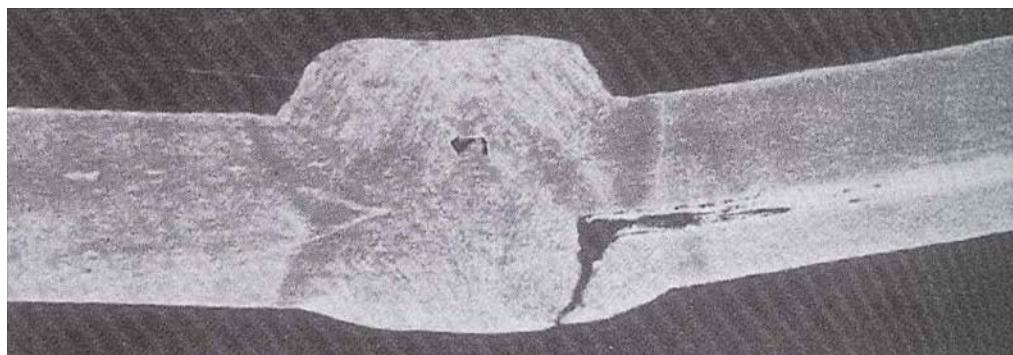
Cracking in a Weld Deposit Caused by Lamination in Steel Base Metal
